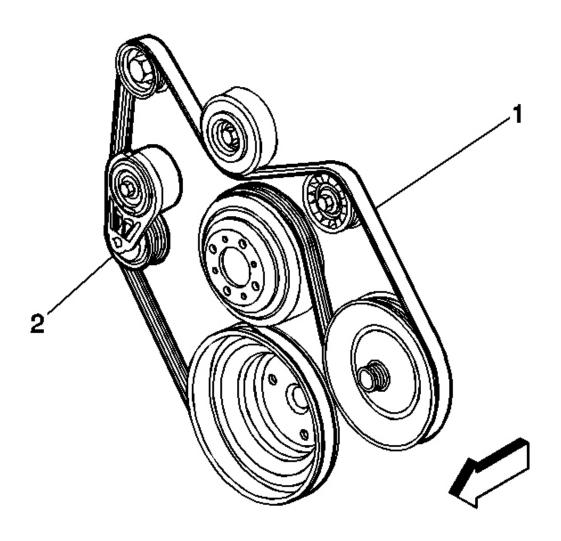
Drive Belt & Tensioner (W/O A/C) Courtesy of GENERAL MOTORS CORP.
